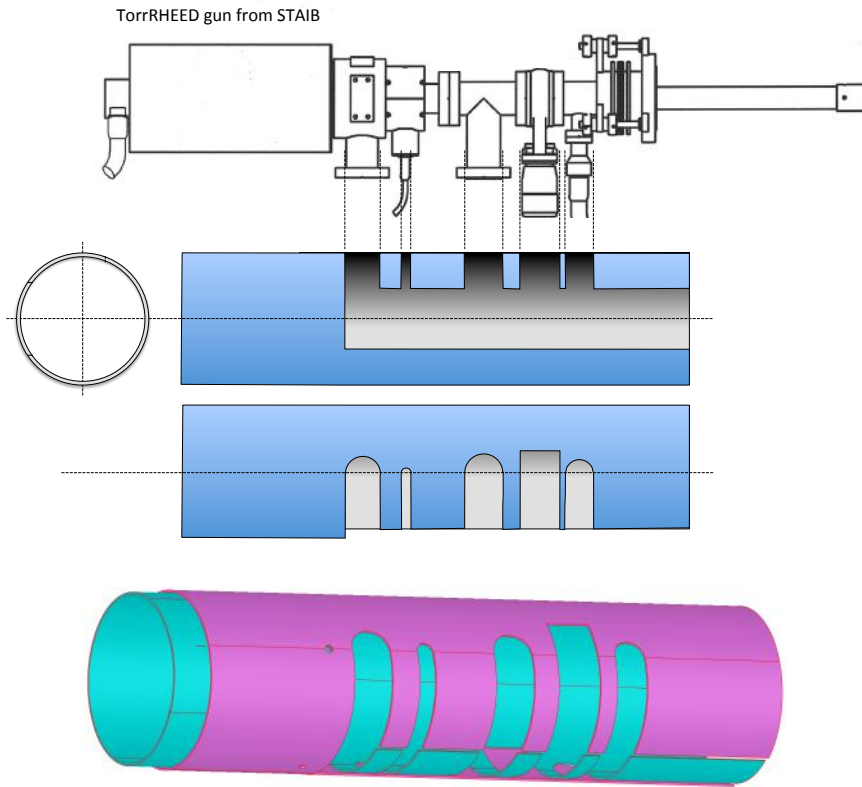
Upper panel: Technical drawing of the TorrRHEED gun (adapted from a technical drawing by Staib Instruments). Center panels: Mu-metal shielding designed to cover the part of the RHEED gun outside of vacuum. The lowest panel shows two mirrored mu-metal shieldings which are rotated after mounting to cover most of the gun with two layers of mu-metal.
